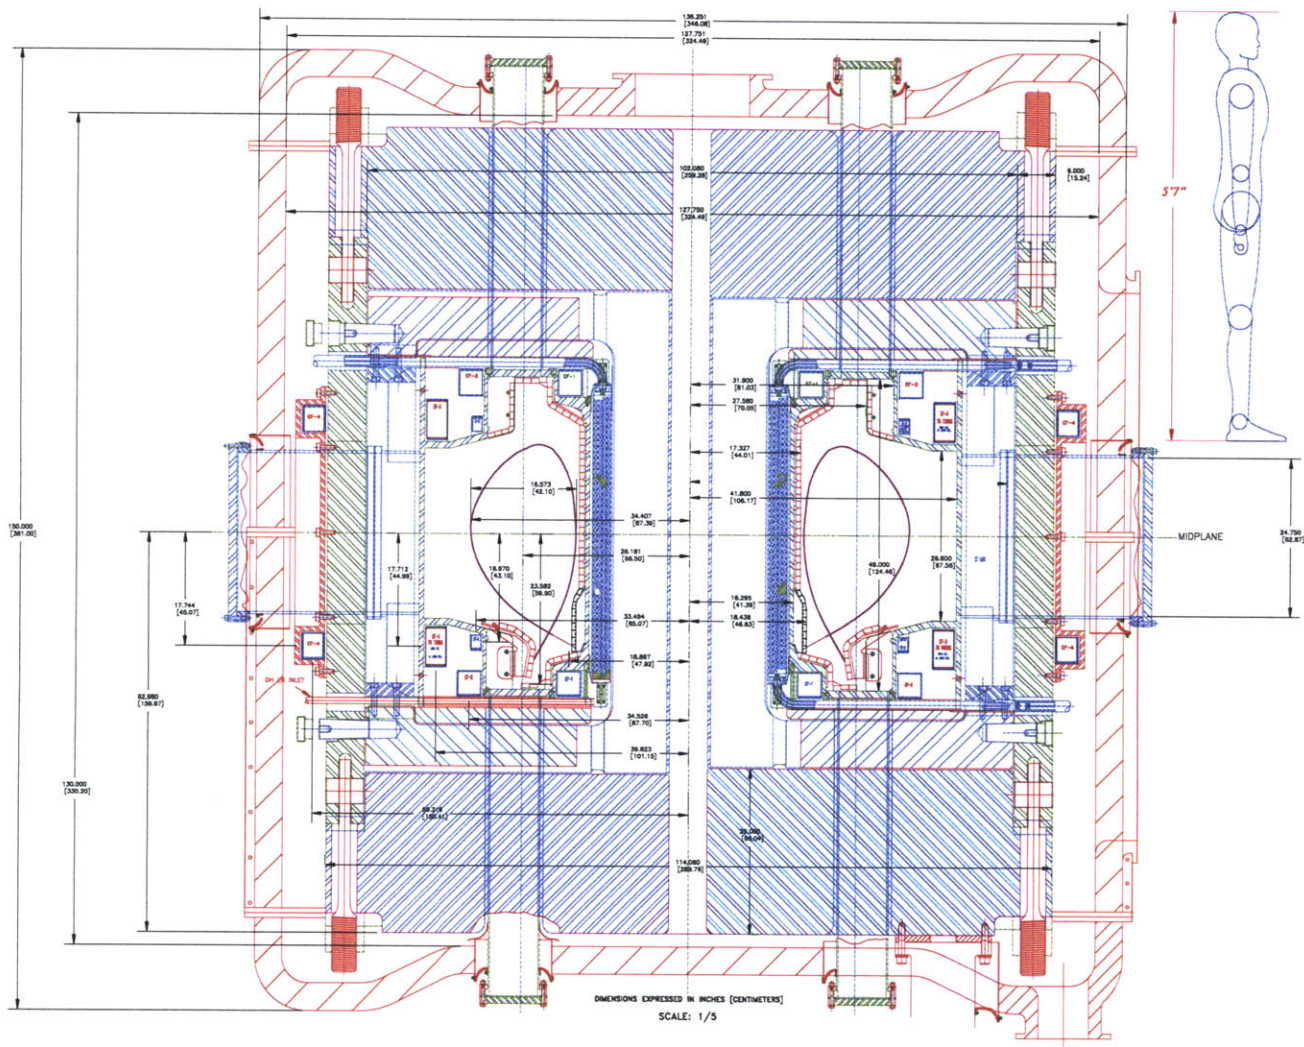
Side cross-sectional CAD view of the Alcator C-Mod tokamak reporting the most relevant dimensions. The compact design of the machine and the cryostat enclosing the vacuum vessel and magnetic field coils make access challenging. For reference, a typical 5'7" graduate student is shown.
